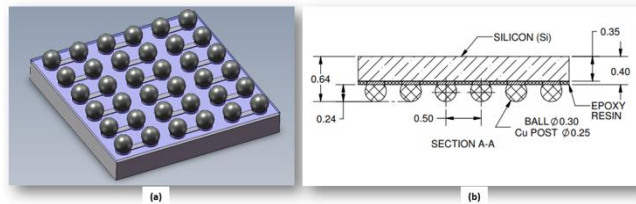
Details of the package before assembling on a PCB showing: (a) SolidWorks full model, (b) Sectional view (measurements in mm)
